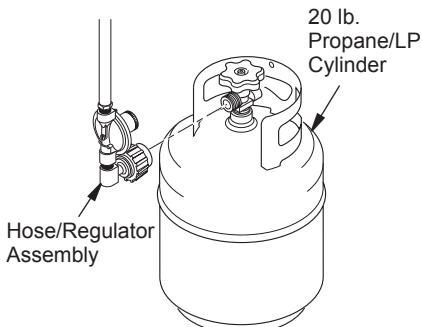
Connecting Hose/Regulator Assembly to Propane/LP Cylinder
